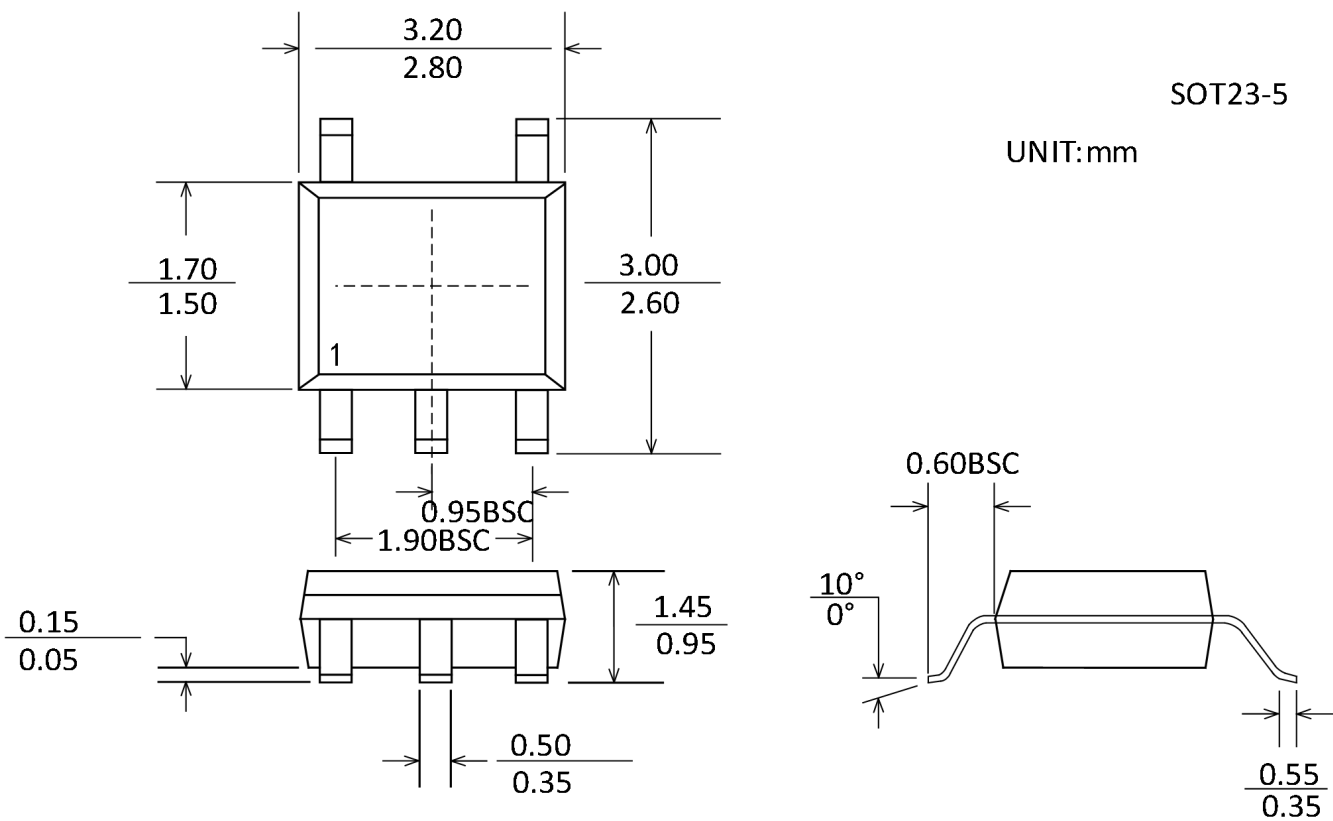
5-Lead Small Outline Package [SOT23-5]
